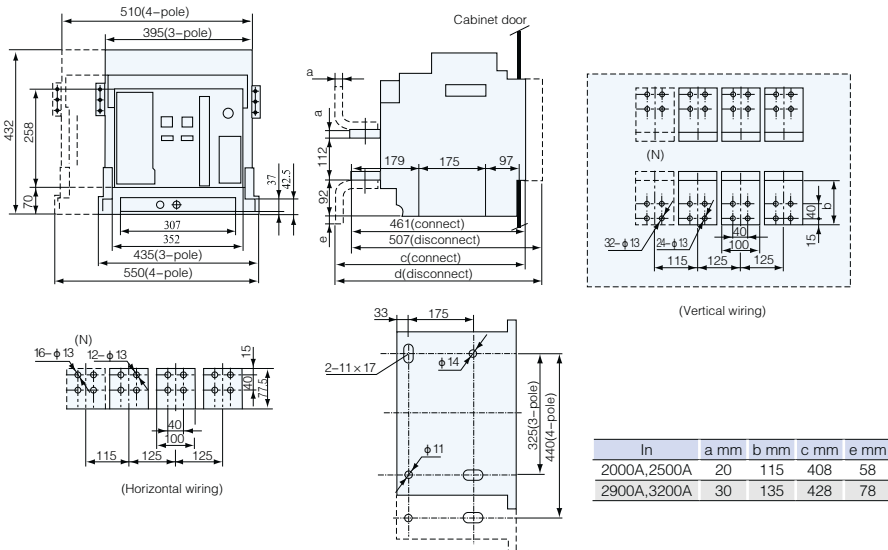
overall and mounting dimensions of drawer type breaker (OW18-3200, 3200/4)
